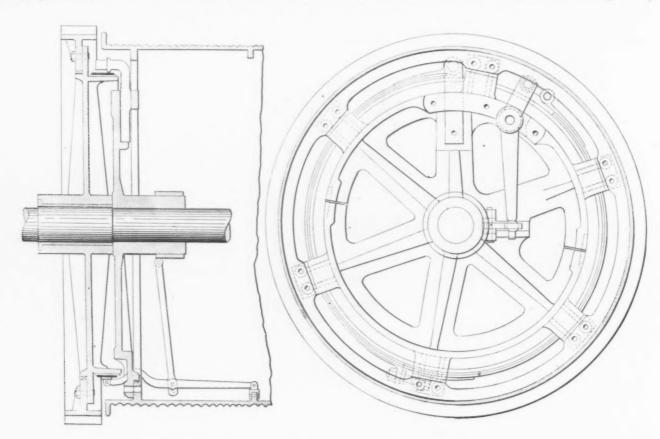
and 3.-Vertical Section and Side View of Drum, Showing Clutch Arrangement.
